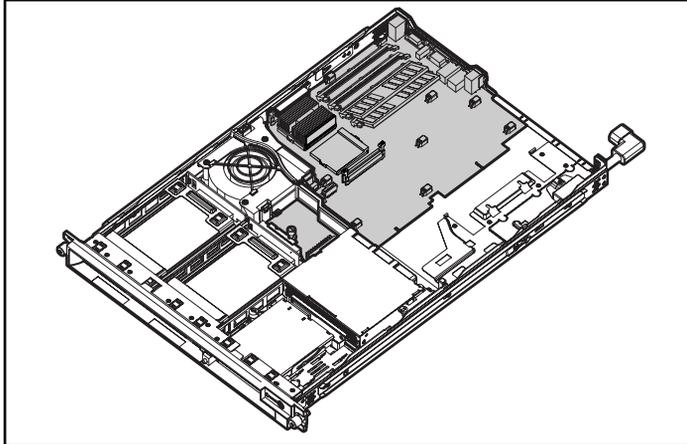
Locating the system board in the ProLiant DL360 G2 server (PCI riser board removed for clarity)
